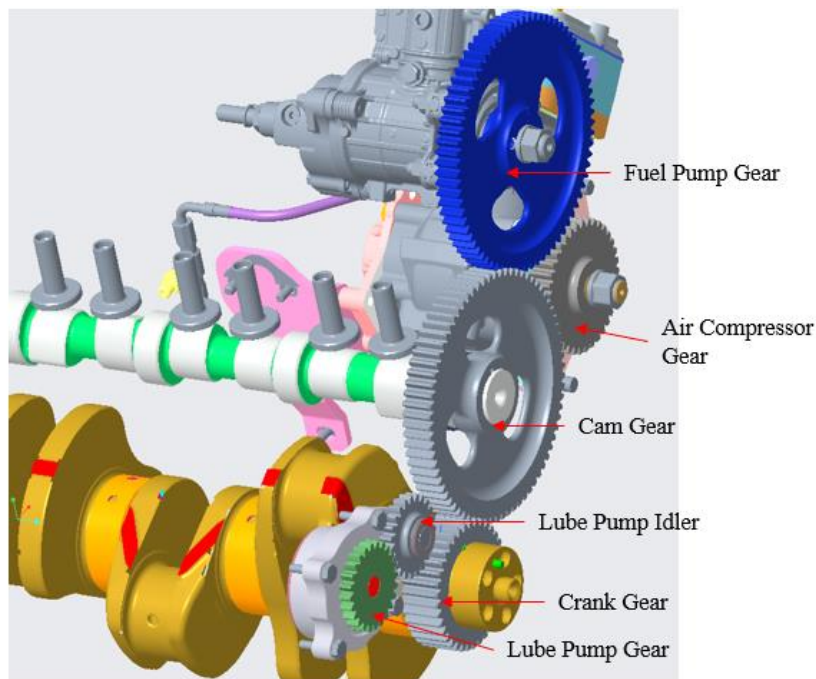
3D model showing the timing gear train with crankshaft and the camshaft
